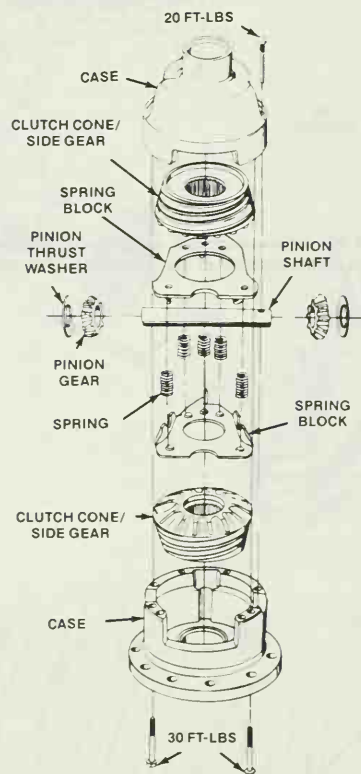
Parts of a cone-clutch limited-slip differential assembly. (Pontiac Motor Division of General Motors Corporation)
